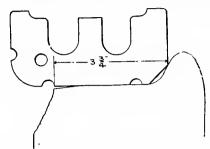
METHOD OF GAGING CHIPPED RIMS.
